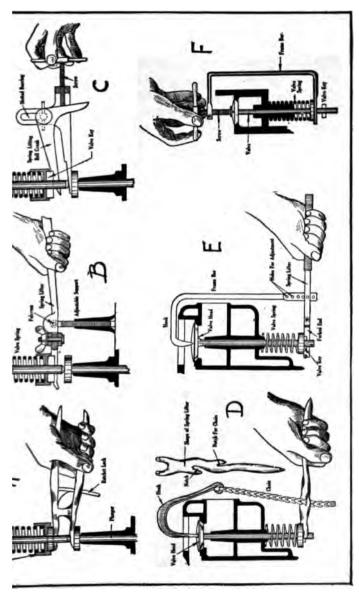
Application of Valve Spring Compressing Tool to Permit Bemoval of Valve Stem Keyn.
